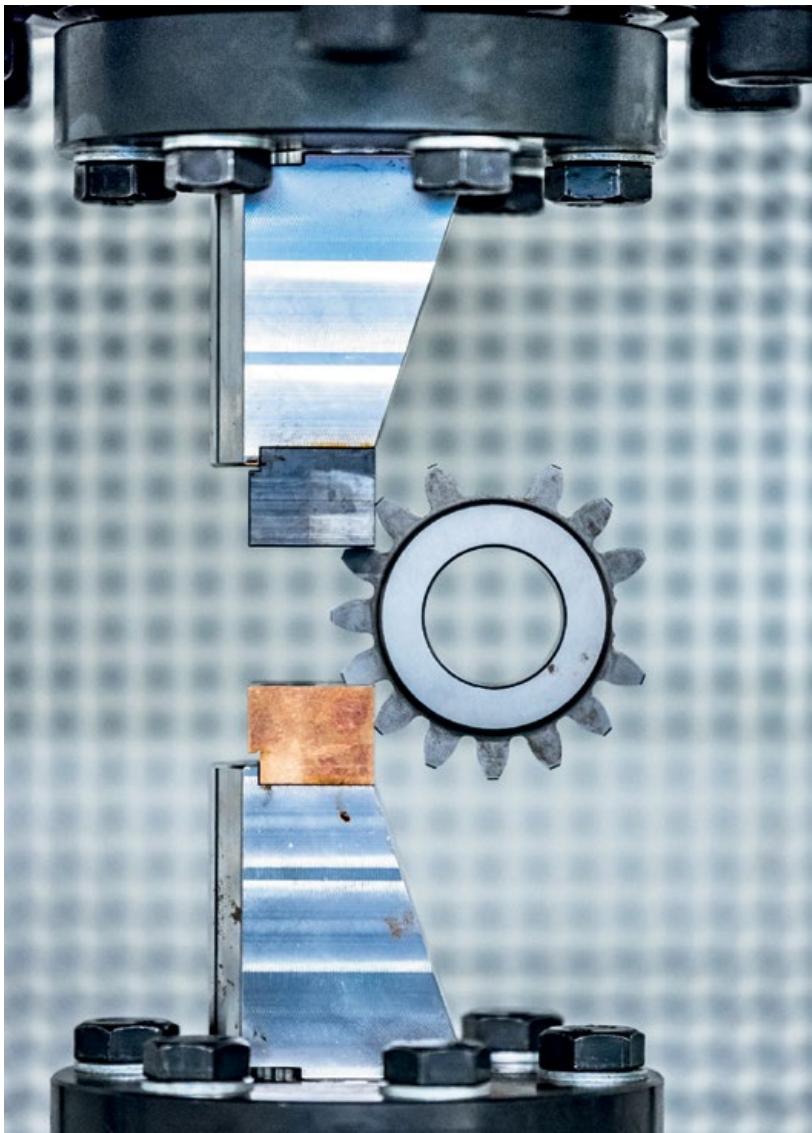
Testing the 17-4 PH stainless steel BJT gear (Courtesy RWTH Aachen)
